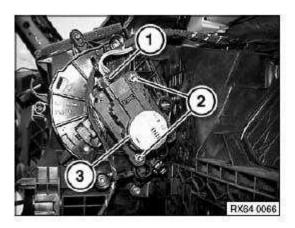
Identifying Plug Connection And Servodrive Courtesy of BMW OF NORTH AMERICA, INC.
